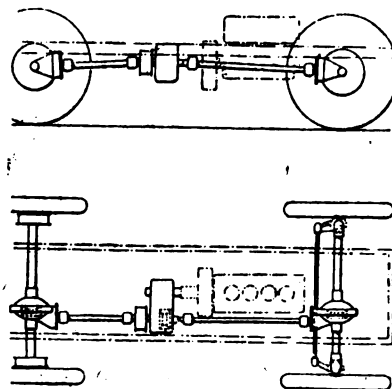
Diagrams showing Spyker Front and Rear Wheel Driving Gear.
